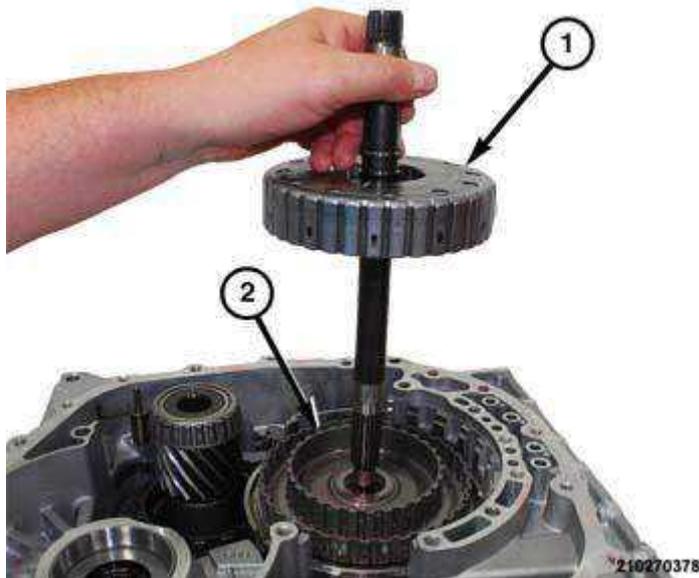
3/5/R Clutch Assembly, 3/5/R & 2/6 Brake Hub Assembly
